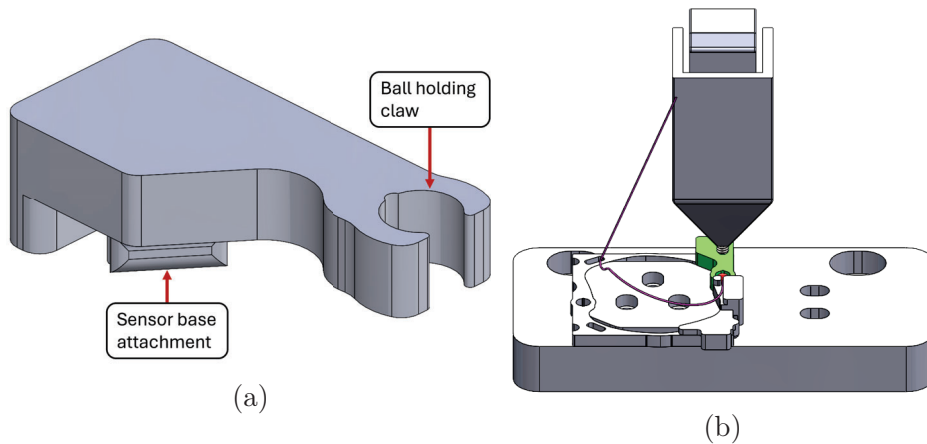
The ball holder ensures the ball plug stays in its proper position during the press operation. Without this holder, the ball has a tendency to shift towards one side of the bottom wire crook during the press operation, tilting the wire assembly and altering the effective preload angle.
